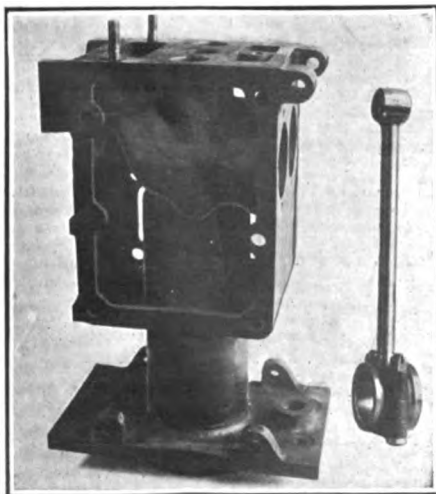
Steel cylinder casting and connecting-rod of Sizaire-Naudin racer
